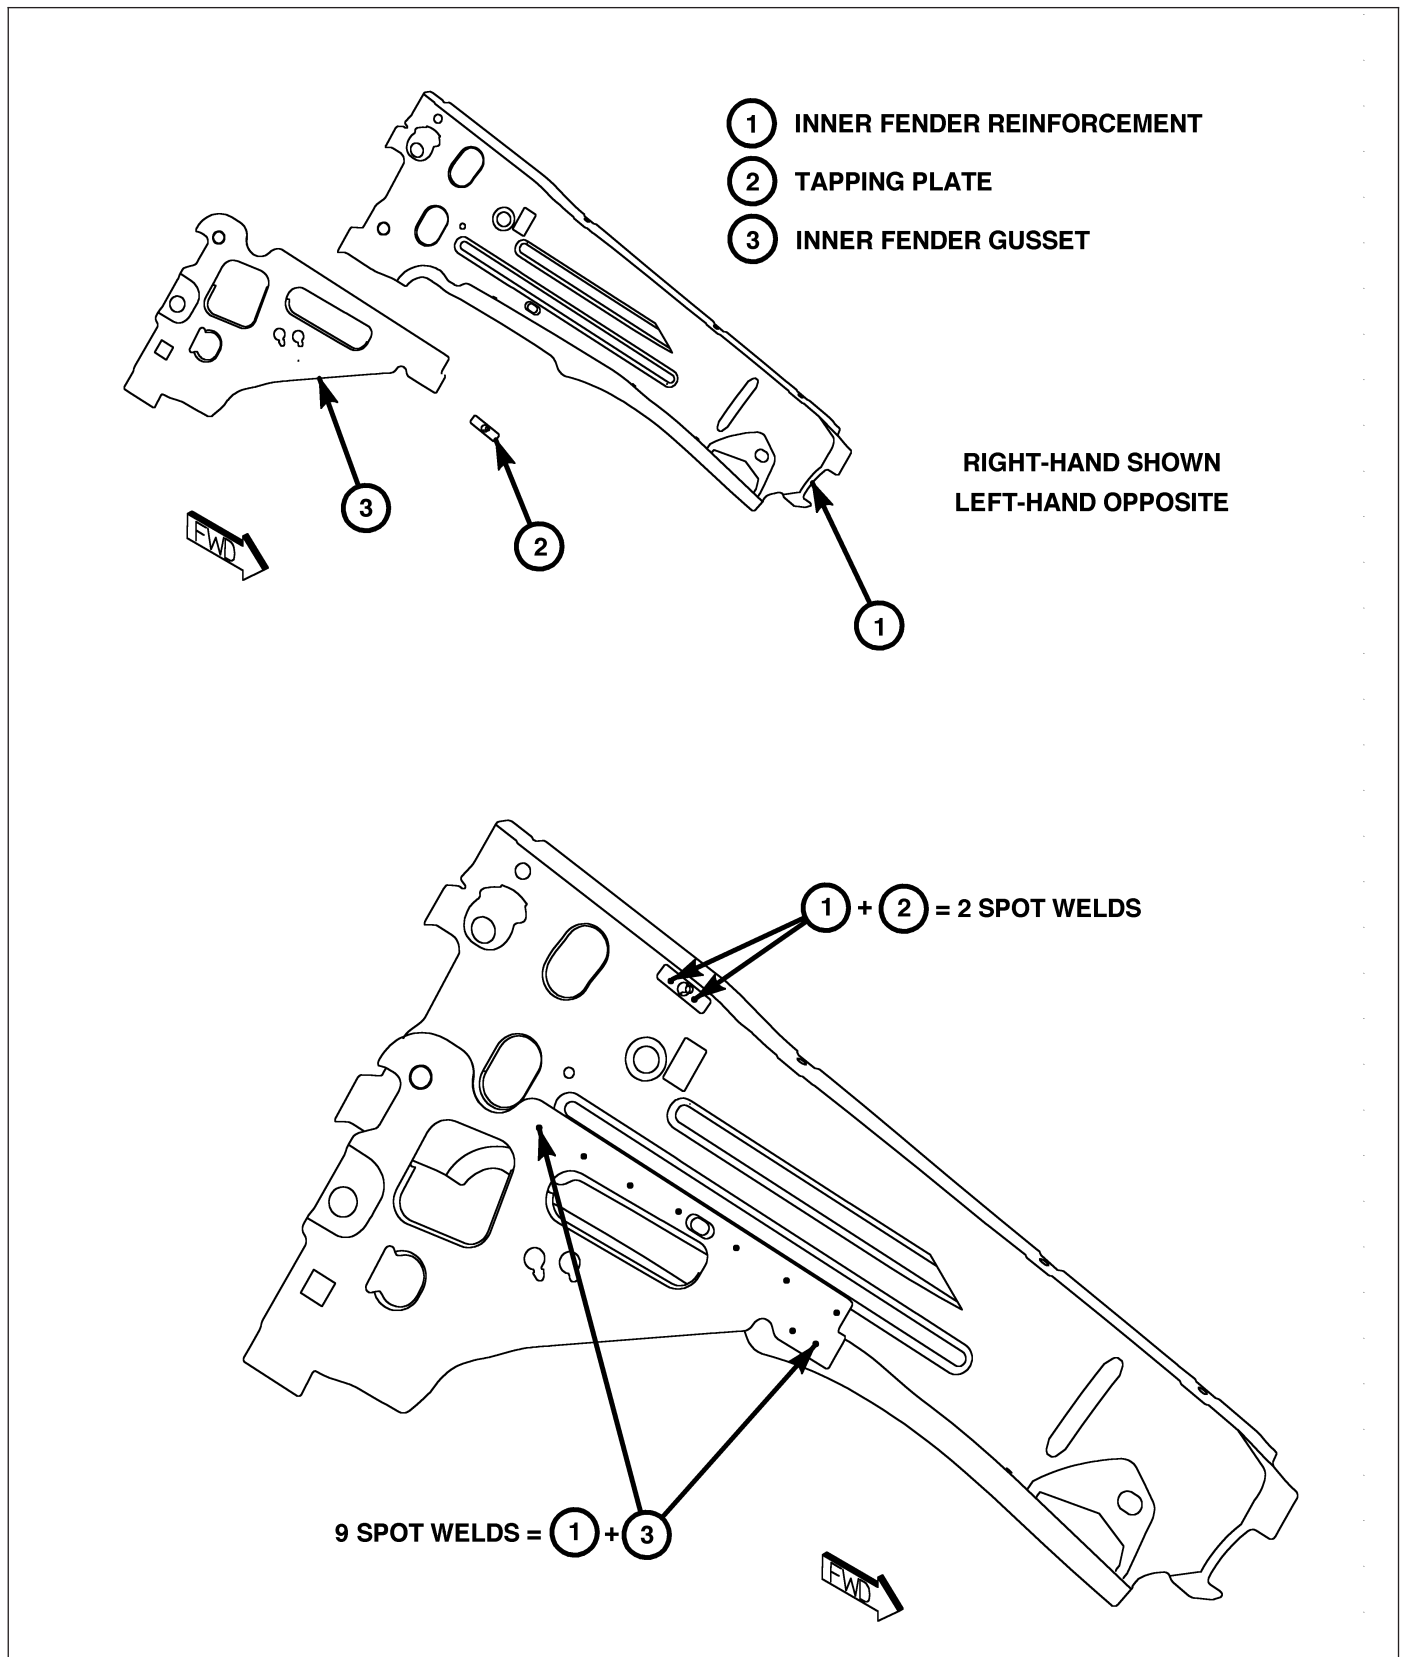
INNER FENDER REINFORCEMENT AND GUSSETS
